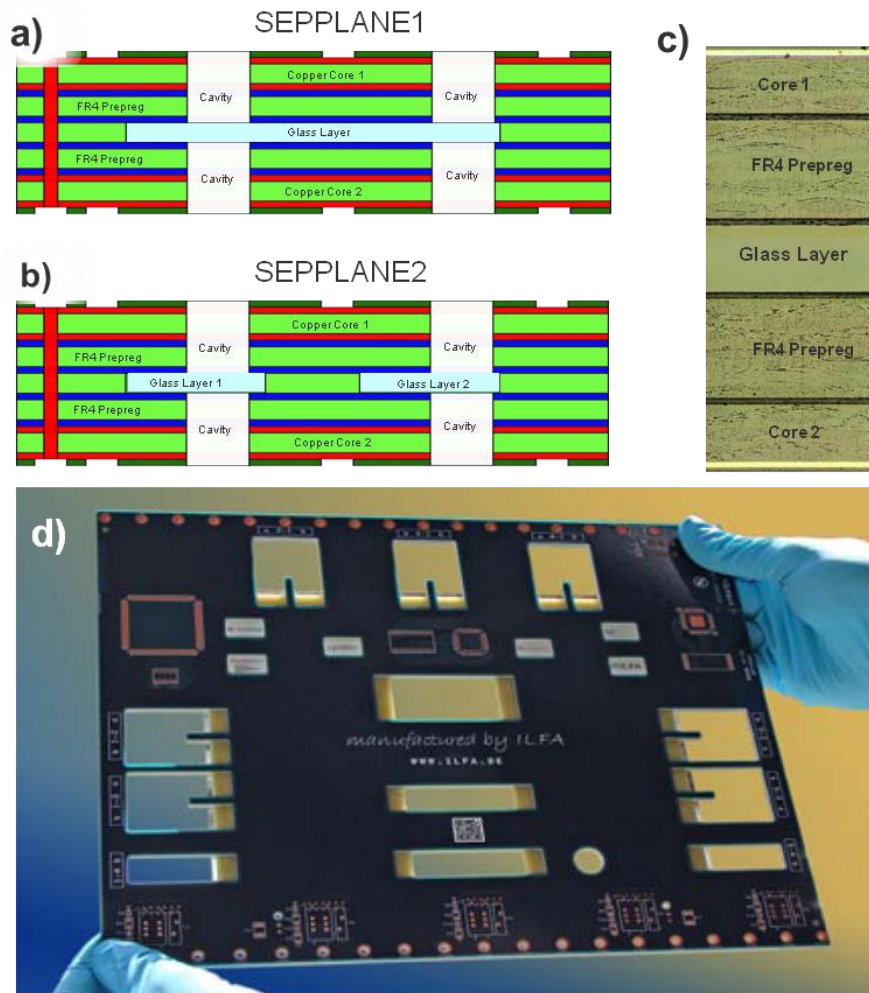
a) SEPPLANE1 stack-up with one single panel optical and two electrical packages with solder mask, b) SEPPLANE2 stack-up with one dual panel optical and two electrical packages, c) Photo of OPCB cross-section, d) photo of unpopulated OPCB backplane circuit board
